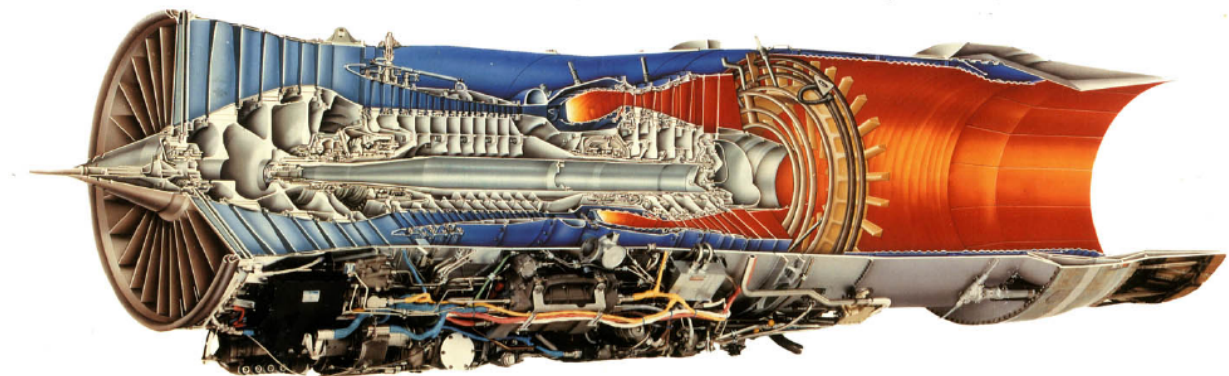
Cut away view of the Pratt & Whitney F100-PW-220
